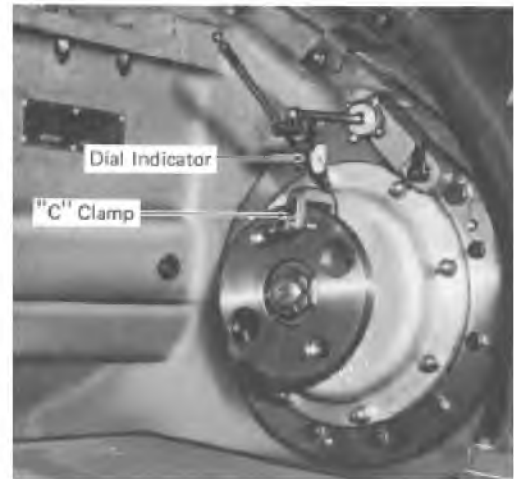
Checking Auxiliary Drive Gear Backlash
